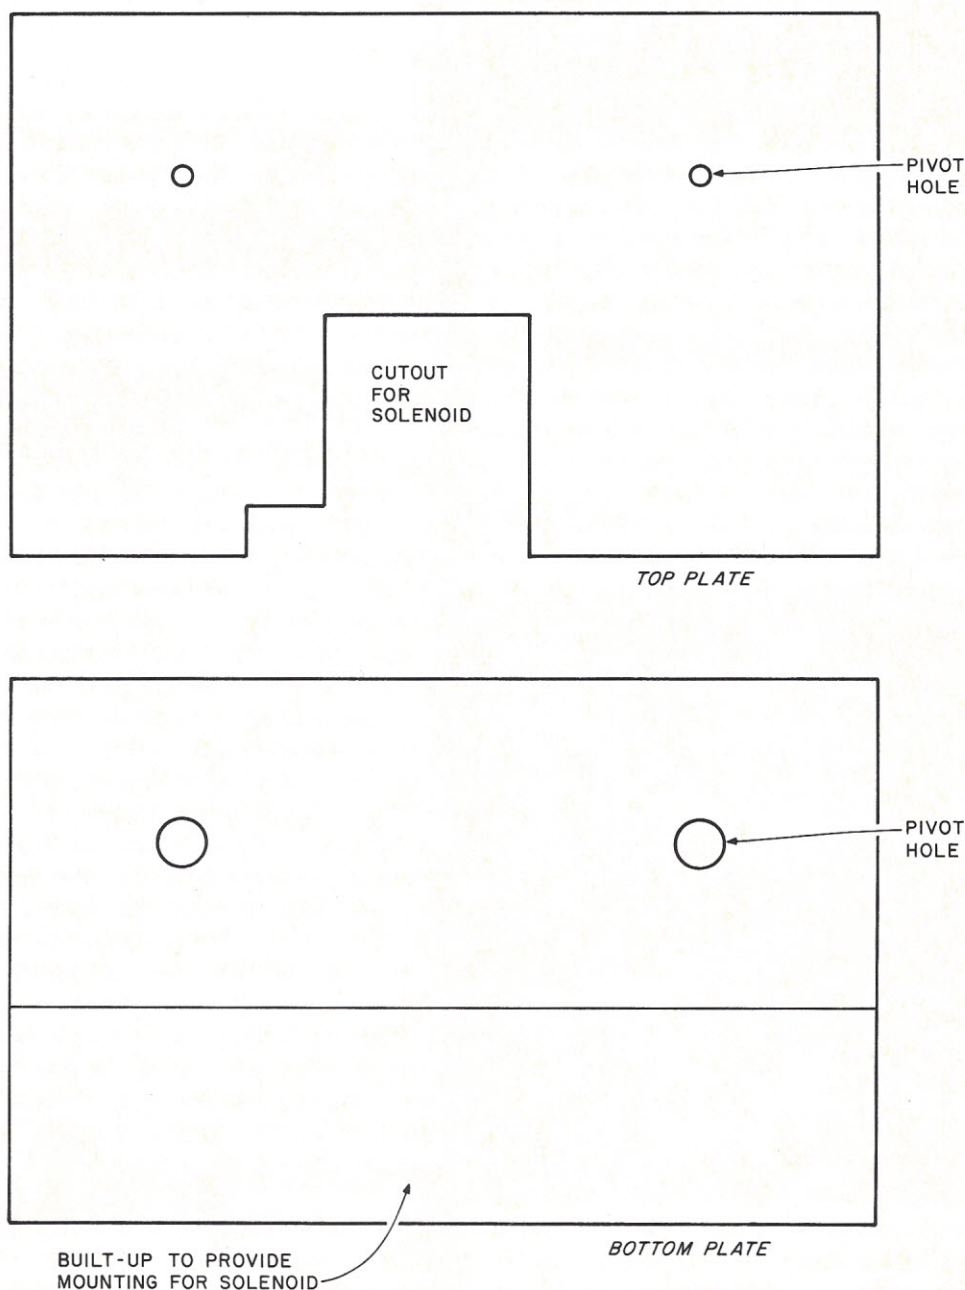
Actual-size patterns of top and bottom plates used to secure gear and finger assembly together. These patterns are simplifications of the plates used in the model depicted in the photos.
